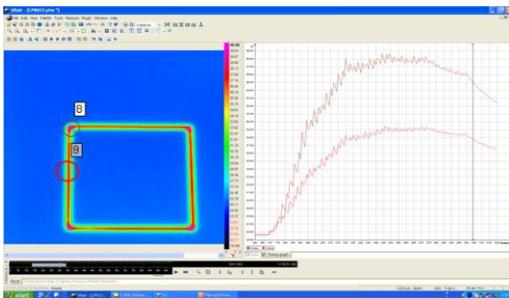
Thermal image of the weld without IPC and max temperatures at two positions on weld seam
